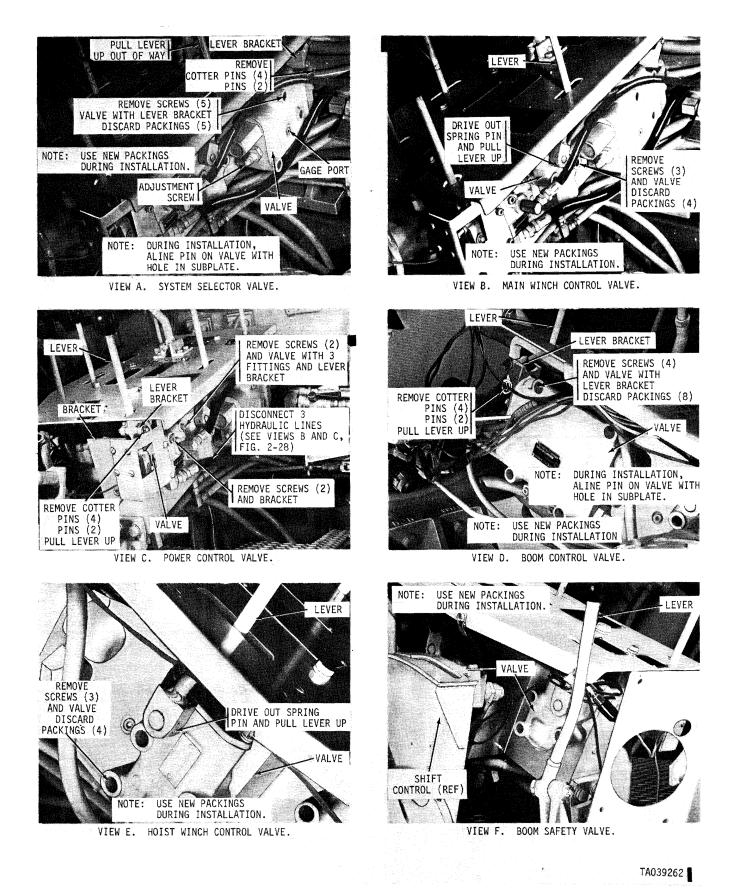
Hydraulic valves on control panel (subplate) assembly -removal and installation.
